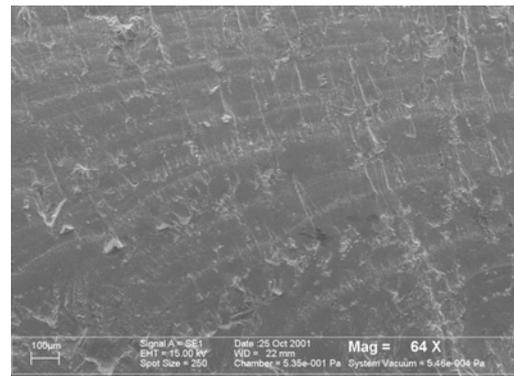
Electron microscope image of the outer regions of fatigue cracking – regular arrest marks clearly shown.
